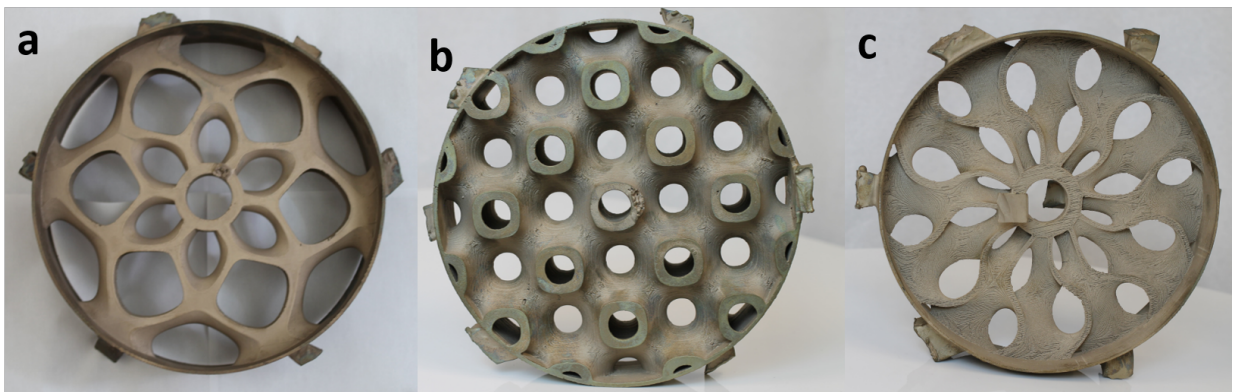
(a) Cast Schwartz Cylindrical Rotor (b) Cast Schwartz Cartesian Rotor (c) Cast Gyroid Cylindrical Rotor
